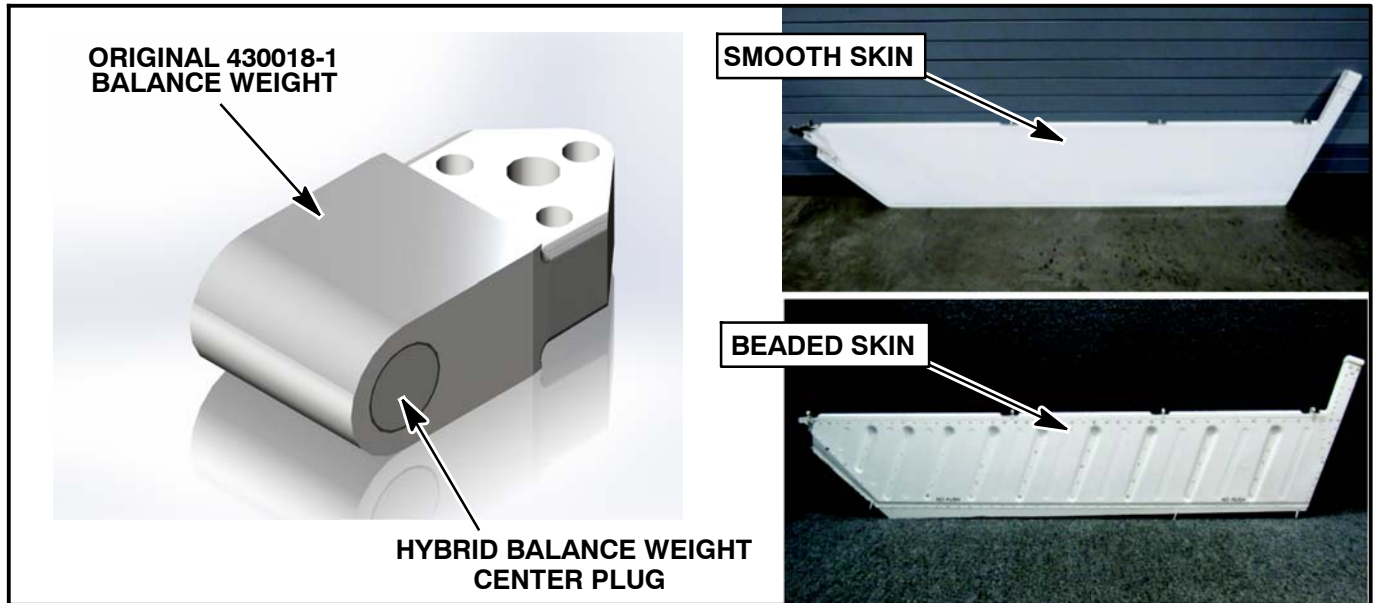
SMOOTH SKIN ELEVATOR AND BALANCE WEIGHT IDENTIFICATION
